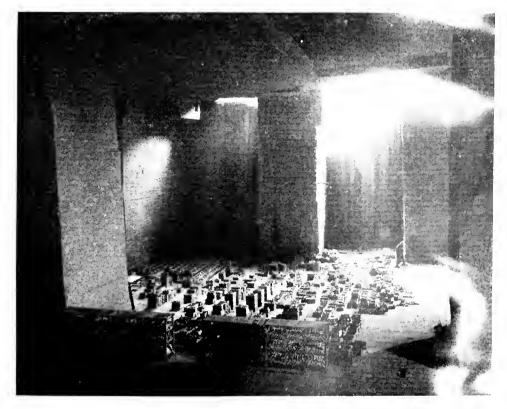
Warehouse and stockroom, Kaneiriyama Works at Shiroyama.
